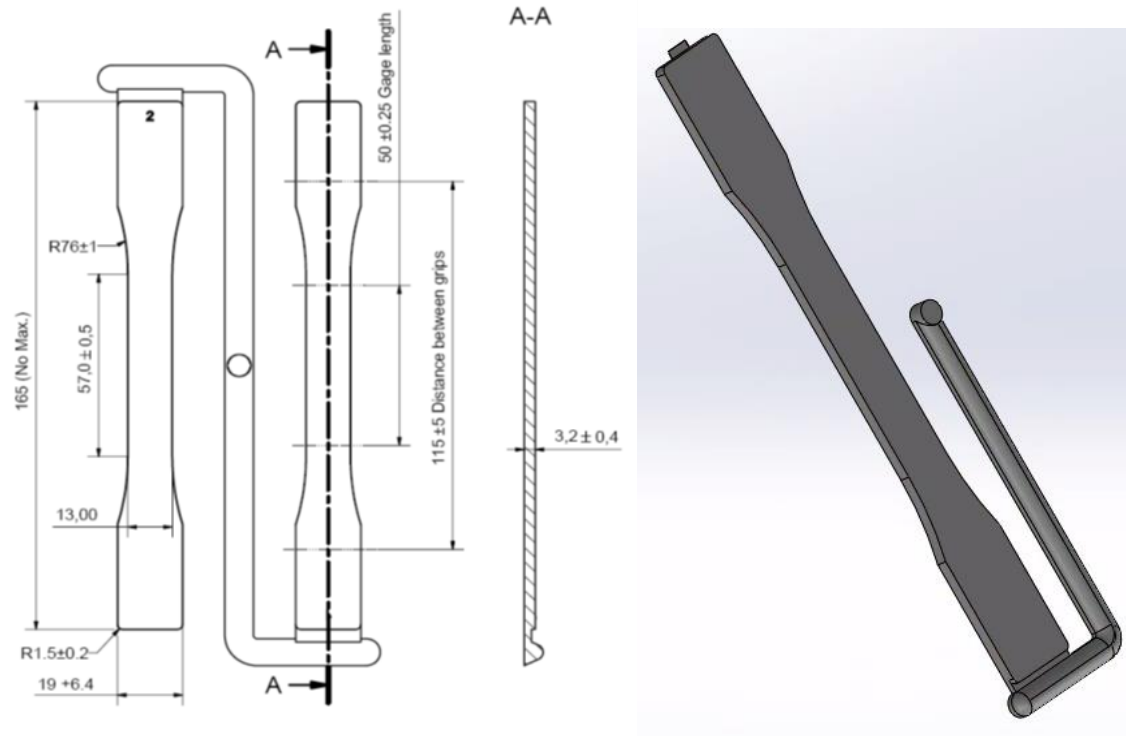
Specimen Design of ASTM D638 TYPE I dog bone mould from Axxicon [9] (left). 3D model of the dog bone mould developed in SolidWorks [8] (right).
